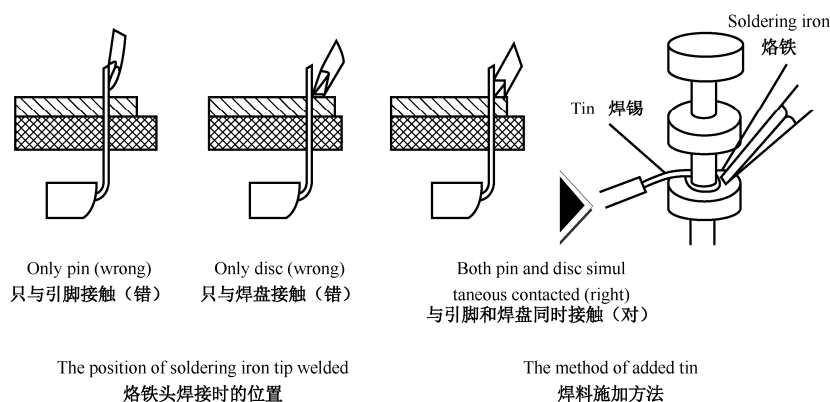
The Method of Added Tin and The Position 焊料施加方法和放置位置
